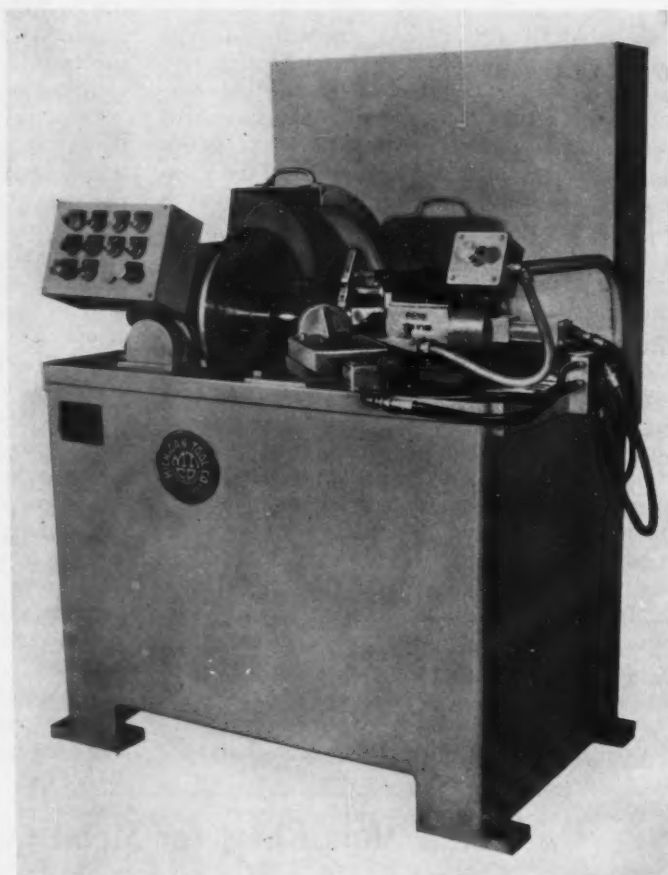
Roto-Flo roller burnisher that strengthens automobile front-wheel spindles by cold-working critical fillet
